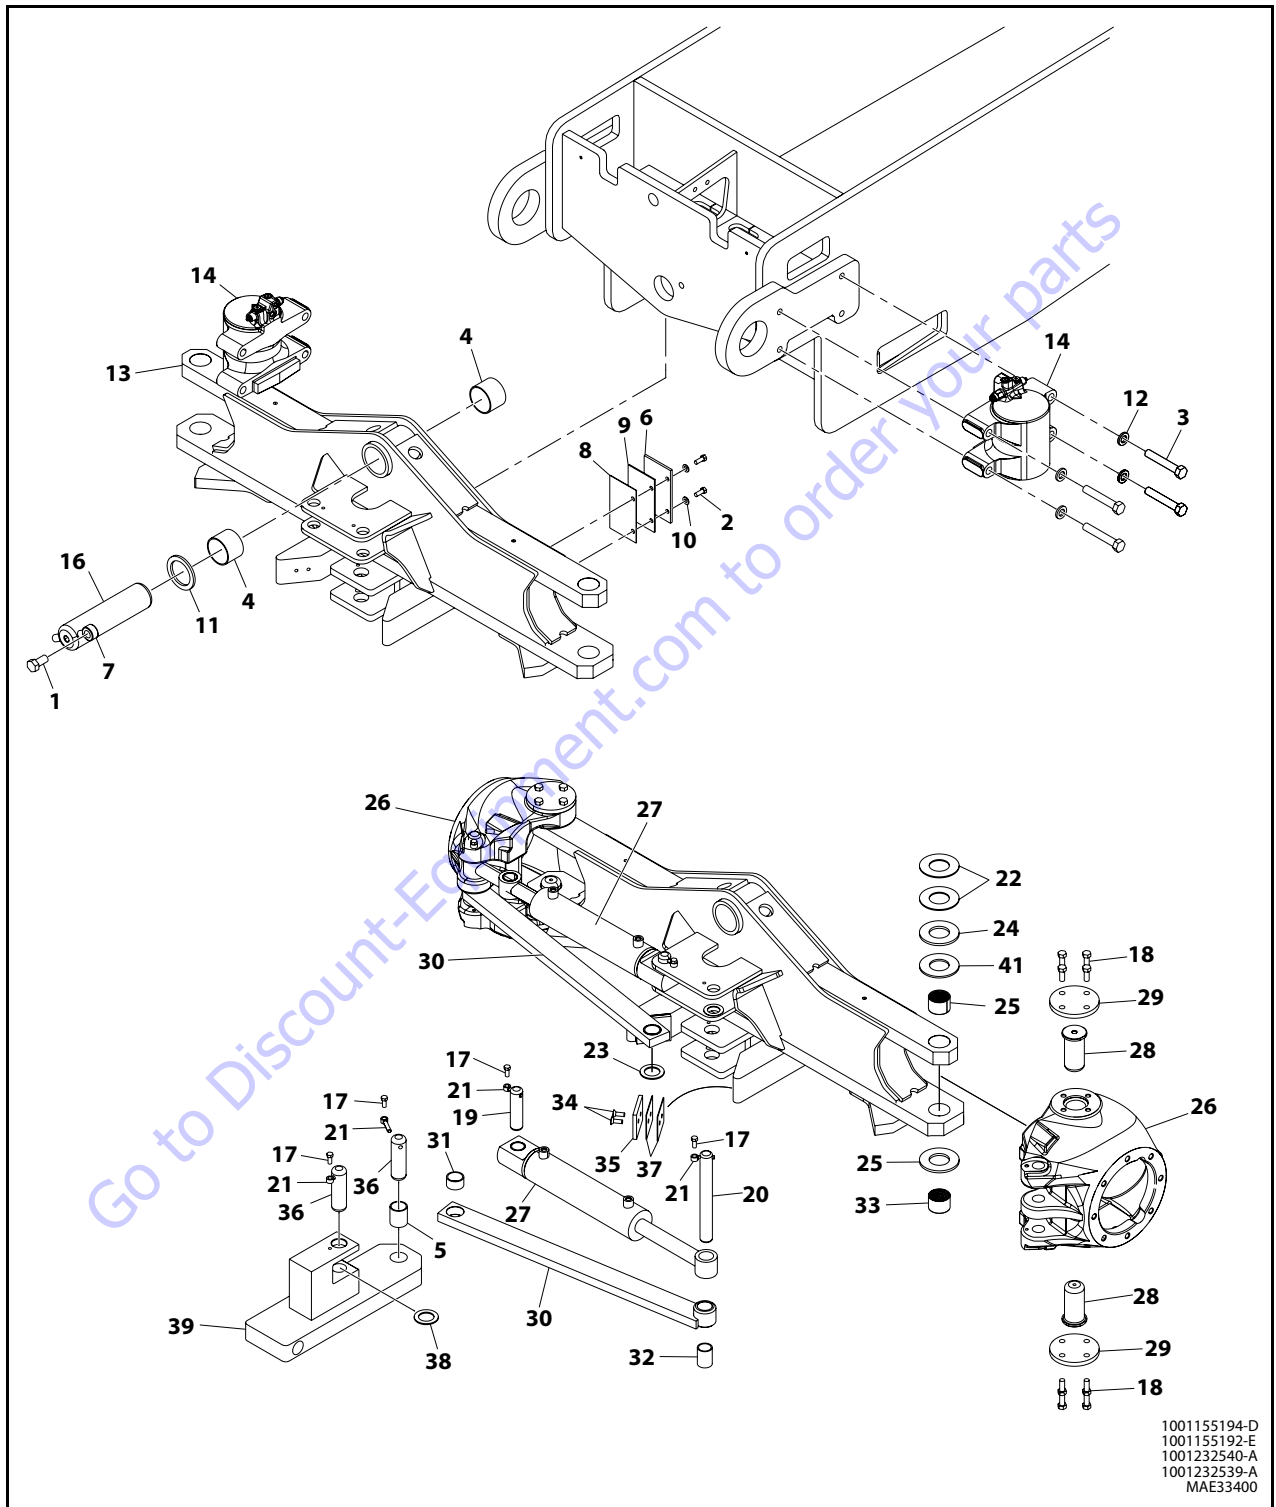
Axle and Steering Installation with Tow Package- Sheet 1 of 2
